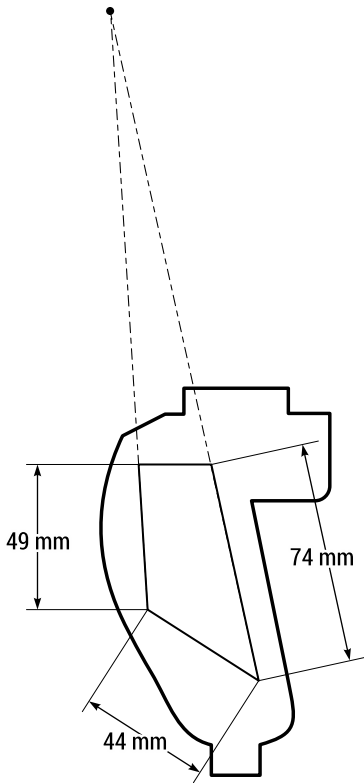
Example of the structural model adapted on the Össur Cheetah knee mechanism [19]
